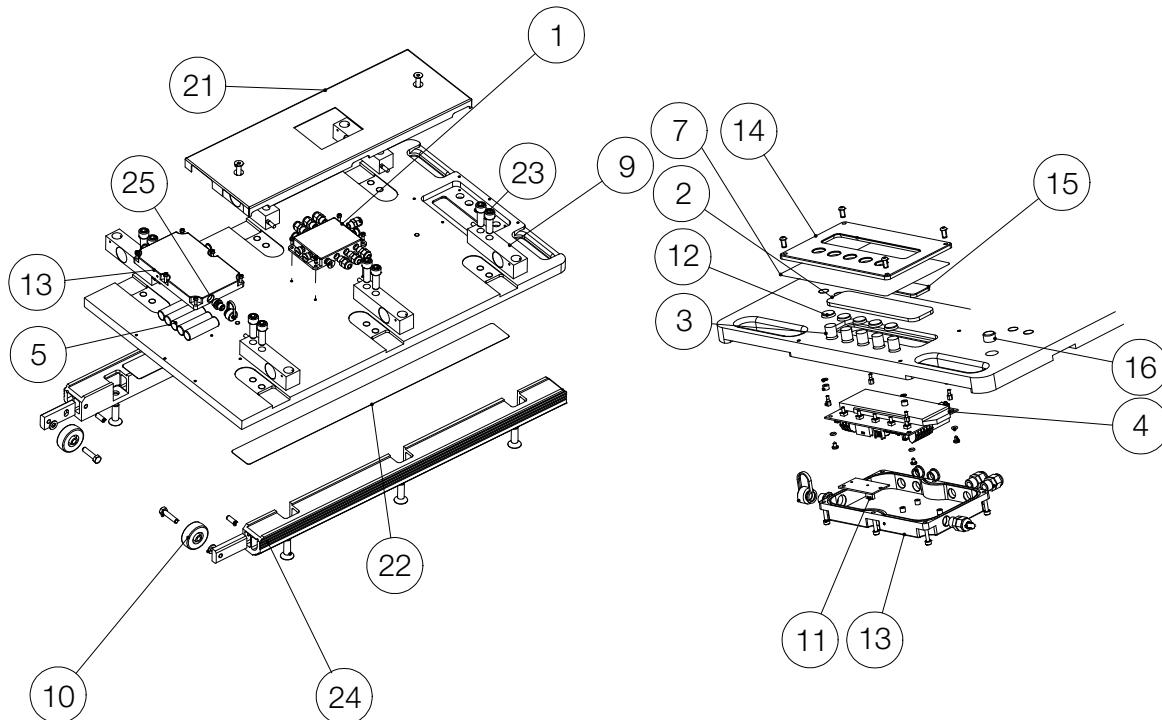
Wheel Weigh Pad (RF-MD, RF-WD, RF-XWD) Replacement Parts Diagram
